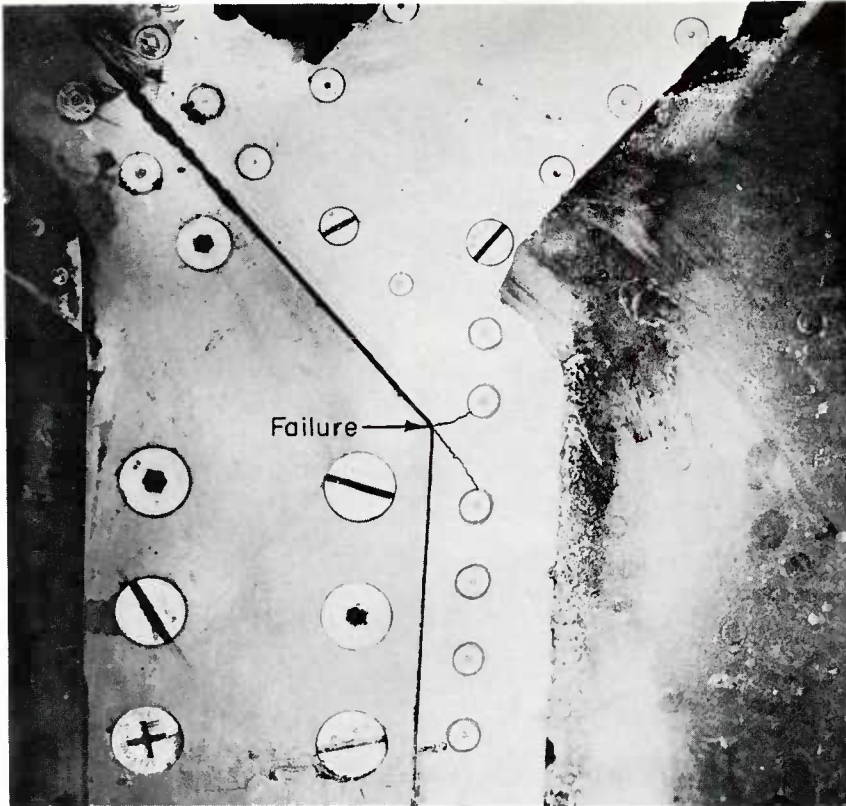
Fatigue failure in Y-splice fitting.
